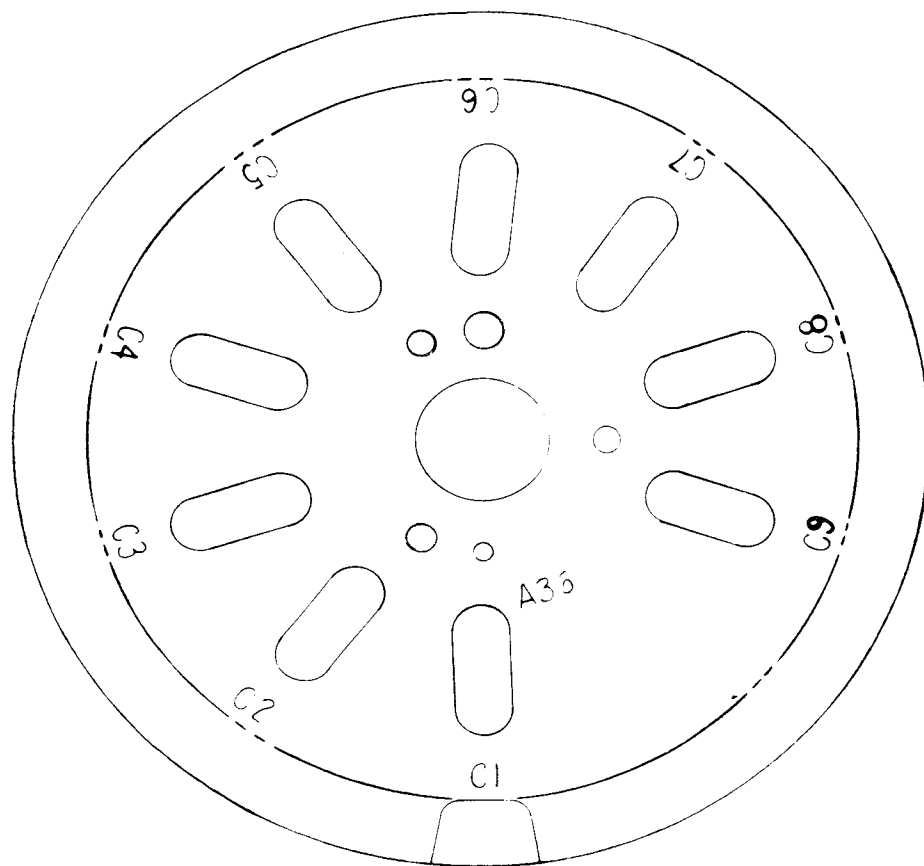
10 kHz Rotor Subassembly A2A4A36,
